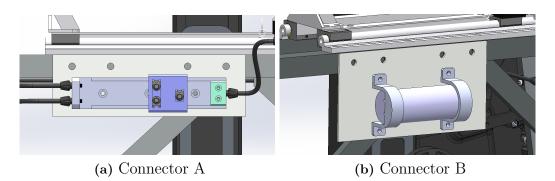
Mechanisms developed on CAD to combine the brake wires
